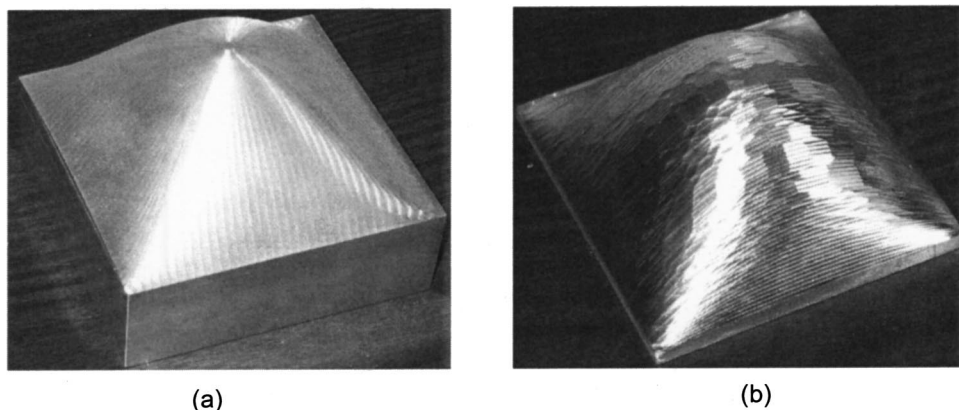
(a) Machined part with steepest-ascending tool paths; (b) machined part with tool paths generated with CATIA system
